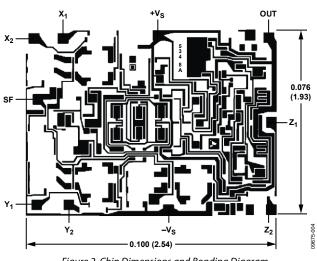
Chip Dimensions and Bonding Diagram Dimensions shown in inches and (mm)
